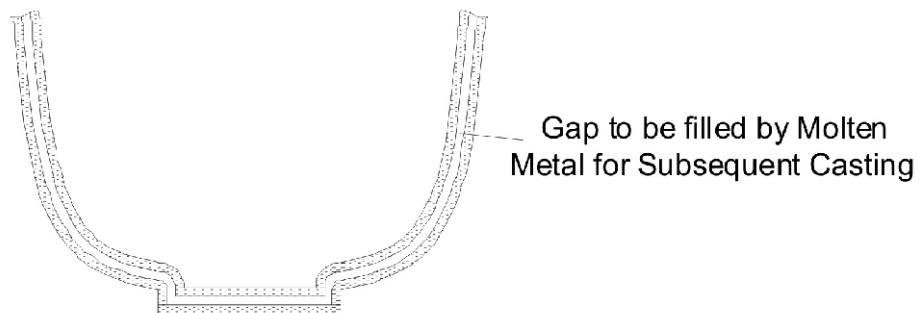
Mould Made of Local Clay Mixed with Binder
